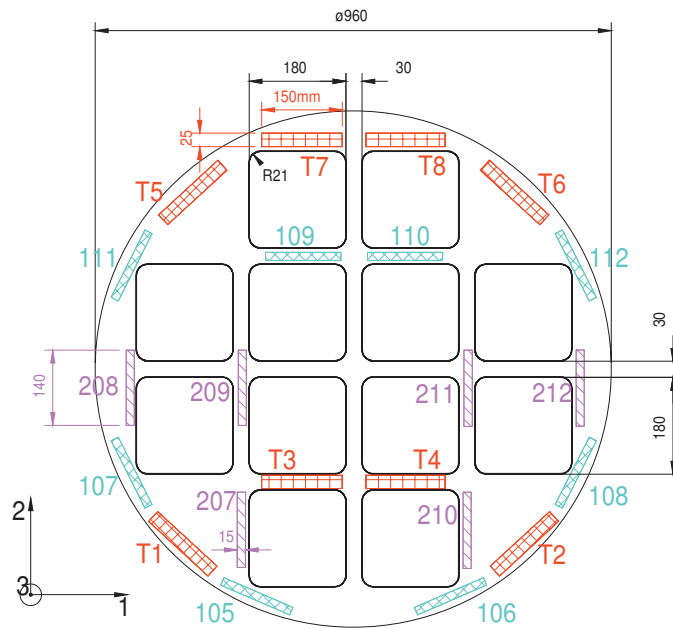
Schematic drawing of layer 2 with specimen numbering. T# indicates in-plane tensile specimens.
